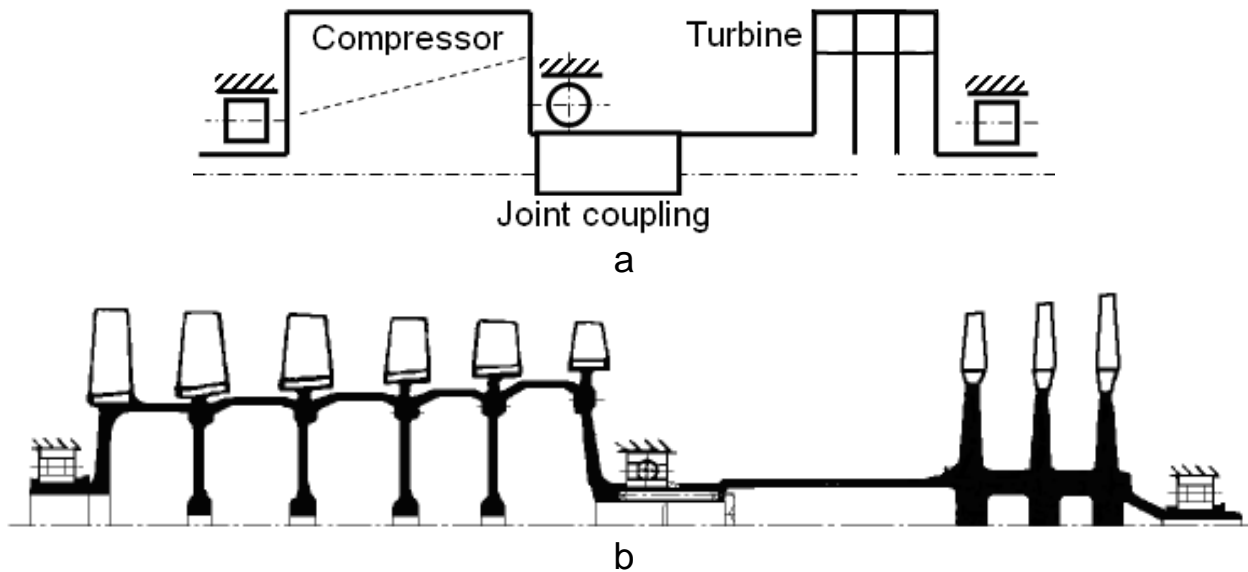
Three-support rotor with radial-thrust bearing placed after compressor, front and radial bearing placed before compressor and rear radial bearing after turbine:
